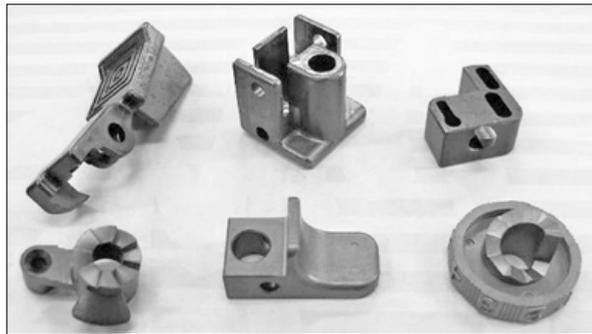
Low alloy steel power tool parts manufactured by Sumitomo Metal Mining (Fe-Ni-C, Fe-Cr-C)
